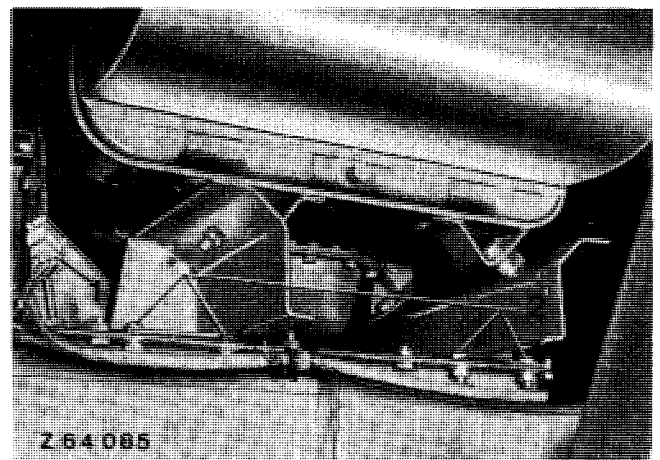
Removing Engine Connections on Radiator Side (Combine 942)
